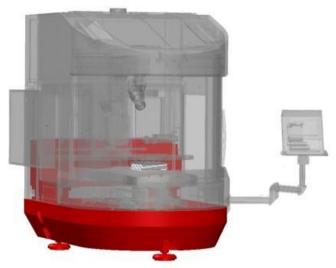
Polymer Granite Base & Welded Steel Frame
